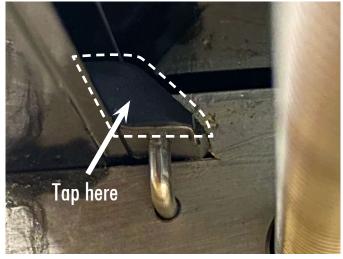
X-axis gib location on the mill and chucker lathe saddles. Tap the end of the gib as indicated by the arrow and dashed line.
